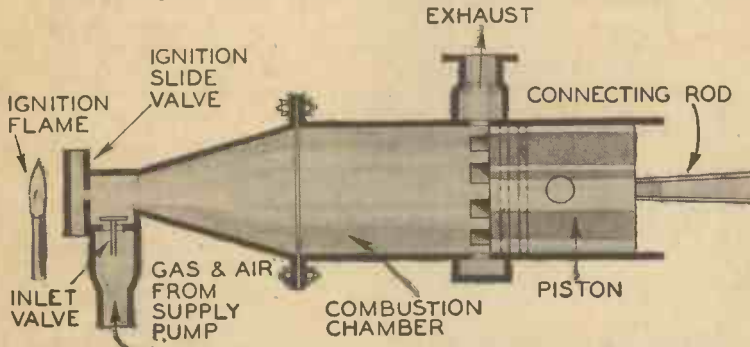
The cylinder arrangement of a Clerk gas engine.
